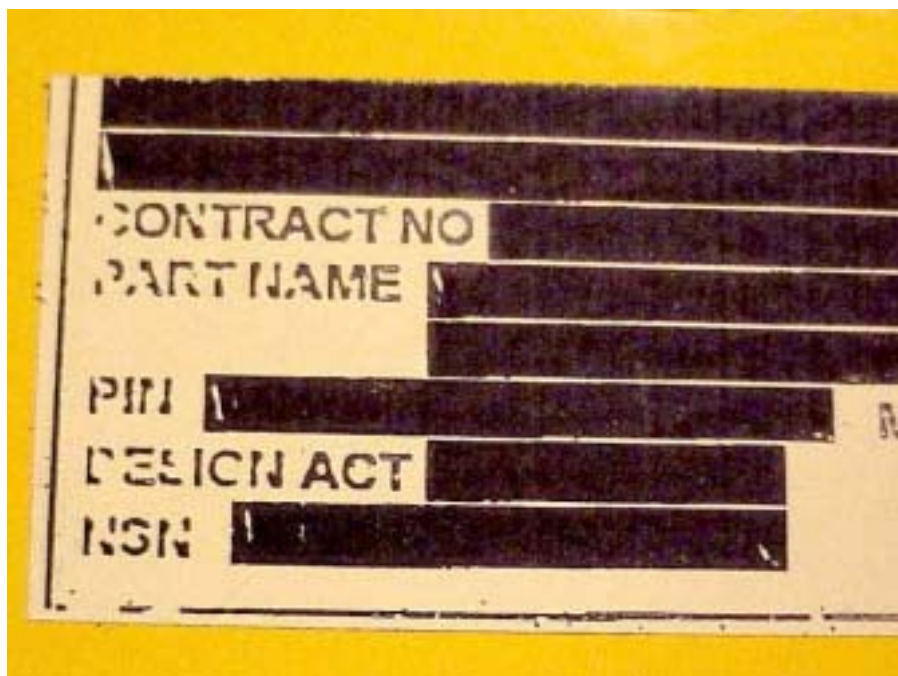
Brady B-652 Label, As-printed with Medium Toner Setting, Showing Typical Damage from Handling
